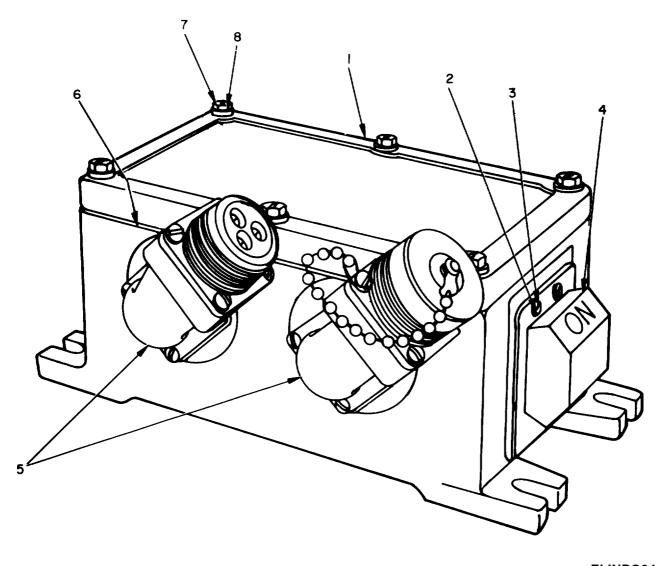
Cable Assembly, Special Purpose CX-10613/G.
